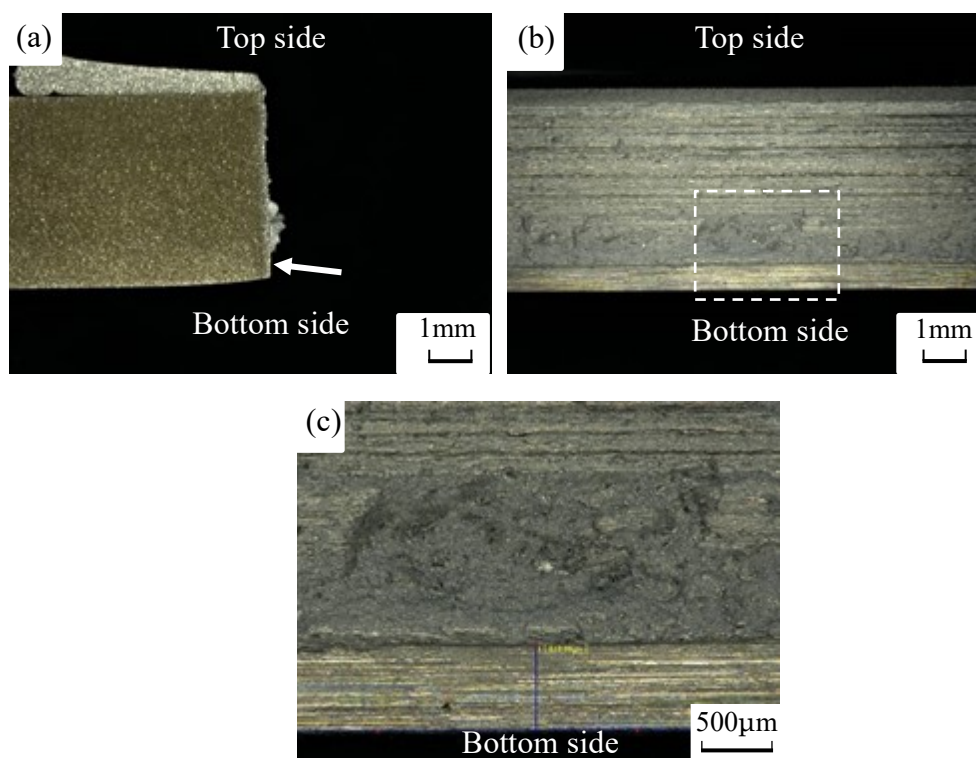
Tensile fracture surfaces of post aged Al-Steel joint: (a) Side view, (b) Fracture surface observed on SUS304 side, (c) Magnified view of the rectangular area in Fig. (b).
